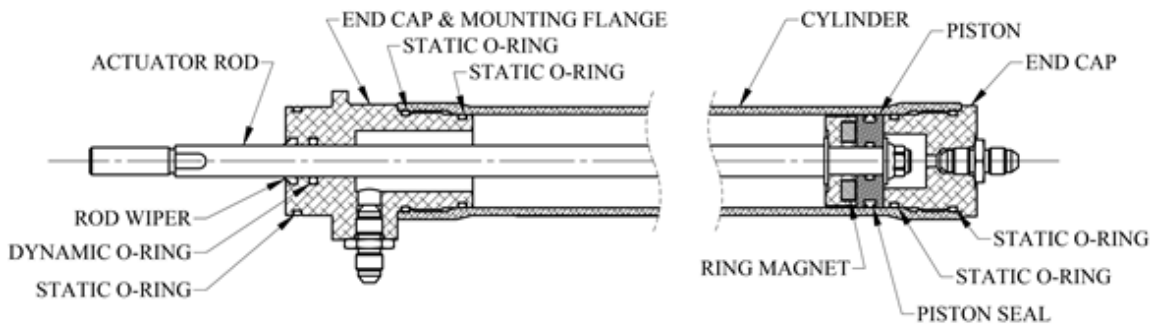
Nose Gear Actuator Cut Away View (65-42400)
